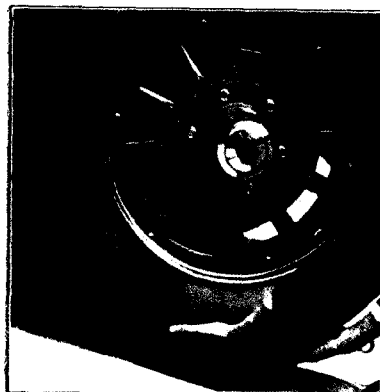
Rotate the wheel until the valve stem is at the top, and pull the bottom of the rim away from the wheel.
